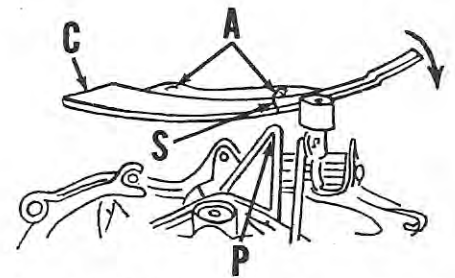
To synchronize throttle on 22 and 25 horsepower motors, turn speed control grip until scribe line (S) is aligned with pointer (P). Loosen screws (A) securing cam (C) to armature plate, and move end of cam as shown until all slack is removed from throttle linkage. Throttle must be held in closed position.
